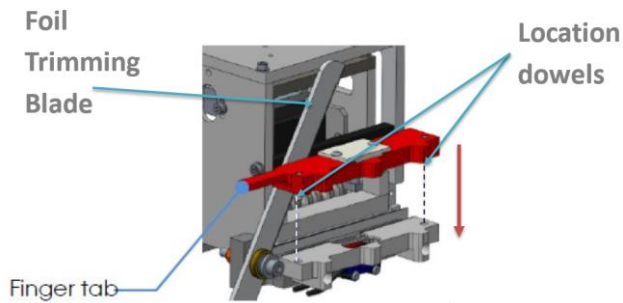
Aligning magnetic foil guide with receiving holes on the platform
